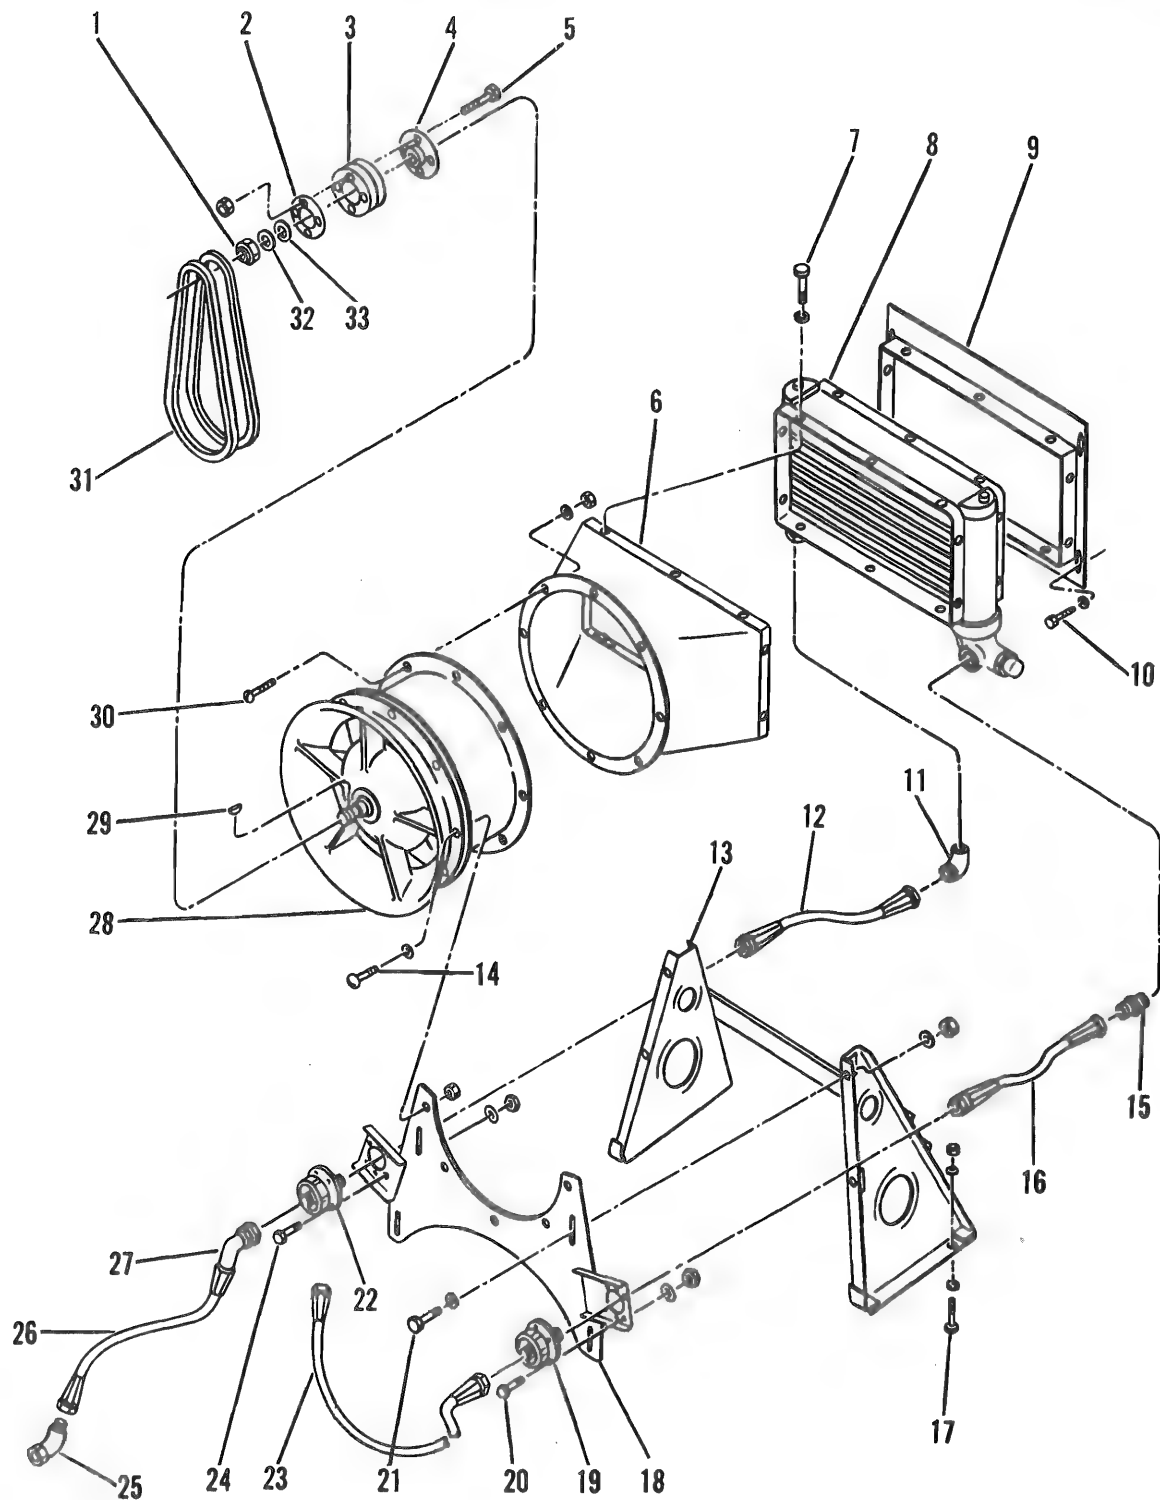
Main Gear Box Oil Cooler and Blower Disassembled (Sheet 2 of 2)
